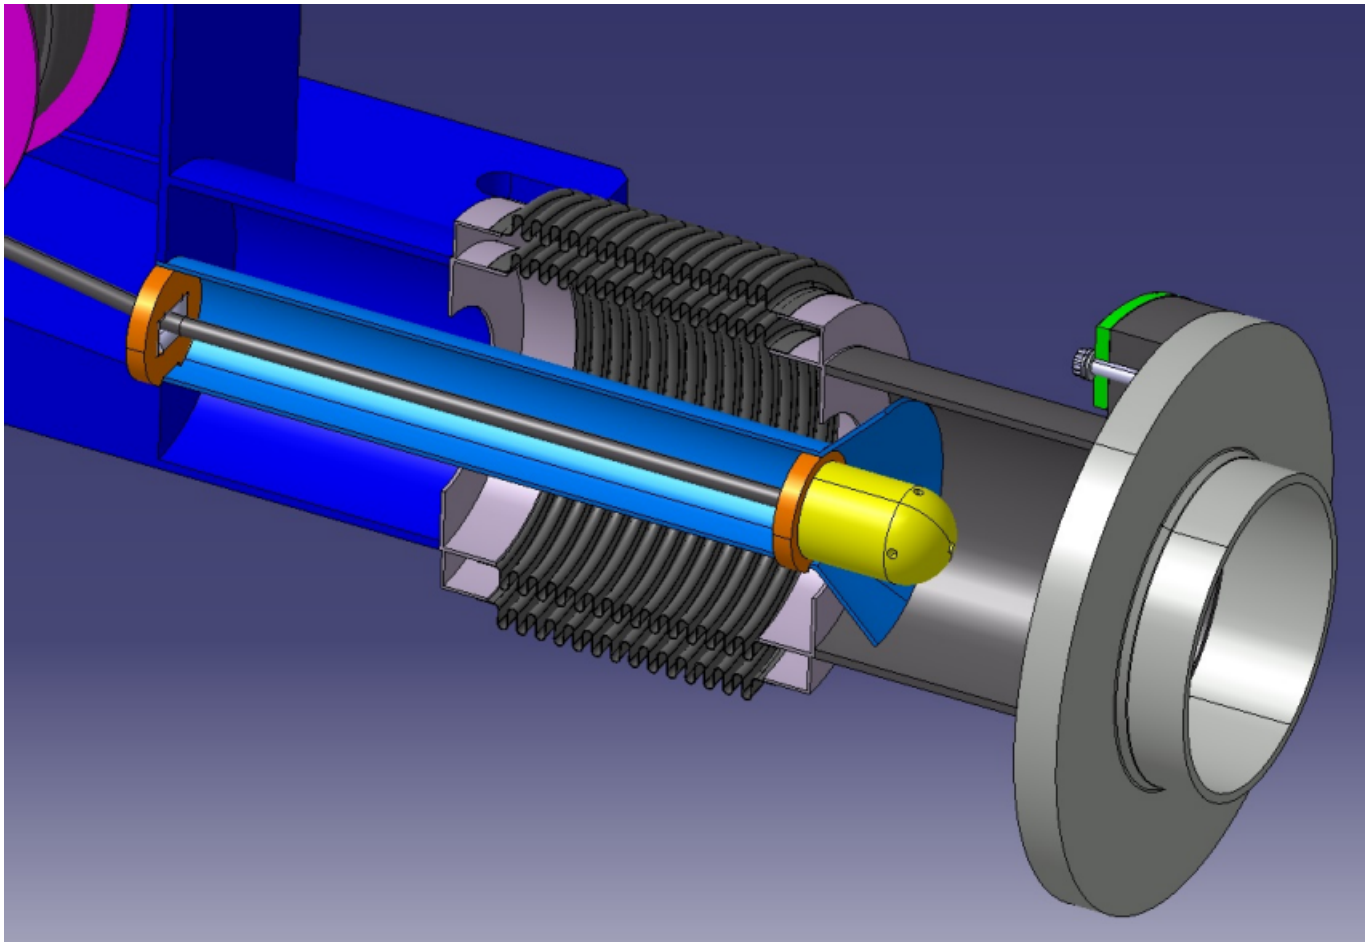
waterjet cleaning tool frontal section (DN300 setup)
